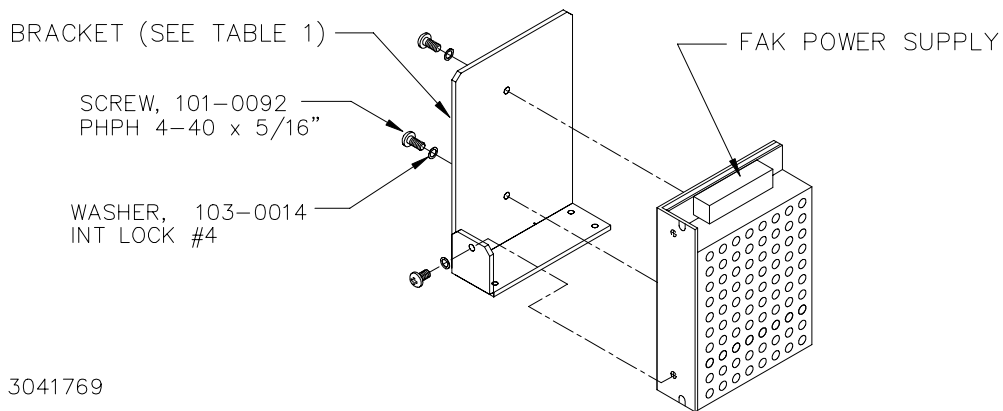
INSTALLING MOUNTING BRACKET ON POWER SUPPLY
